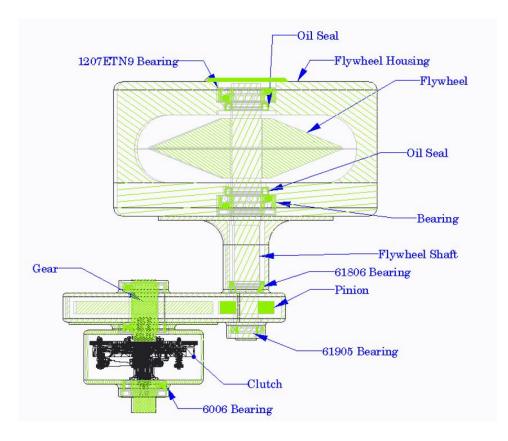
Sectional View of Flywheel Housing, Gearbox and Clutch
